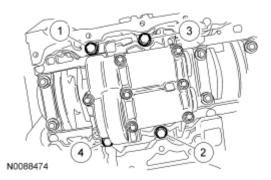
Identifying Balancer Unit Bolts Tightening Sequence
